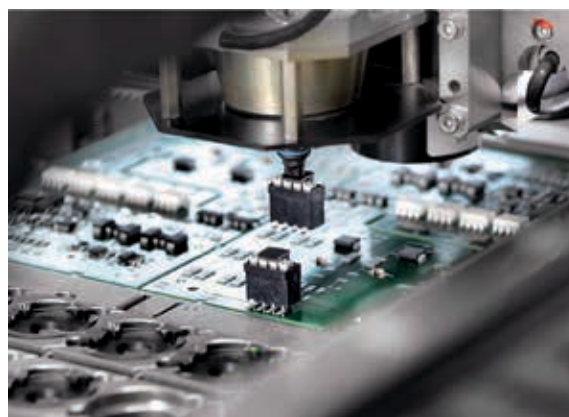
Pick+Place process for SMT PCB connectors – source: Weidmüller
